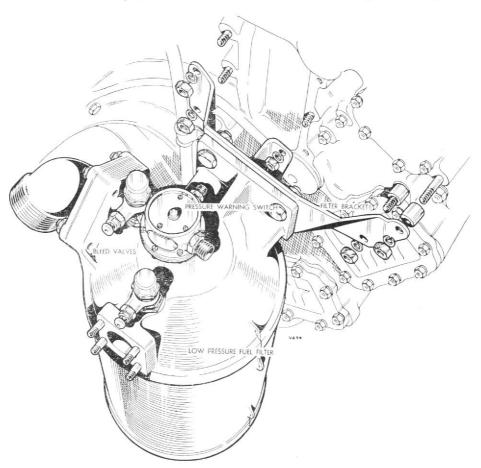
Tecalemit low pressure fuel filter and attachment bracket.
